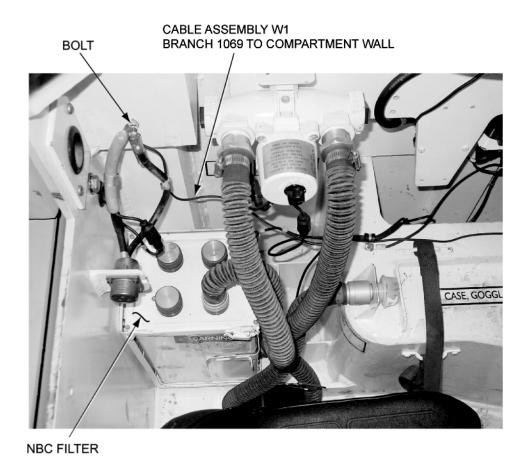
Routing Cable Assembly W1 Branch 1069 to Compartment Wall
